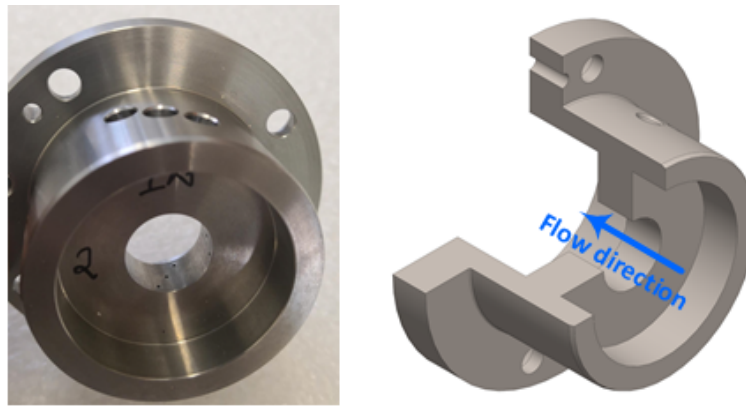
Photograph and cut-view of manufactured Smooth Seal (SS) used for testing
